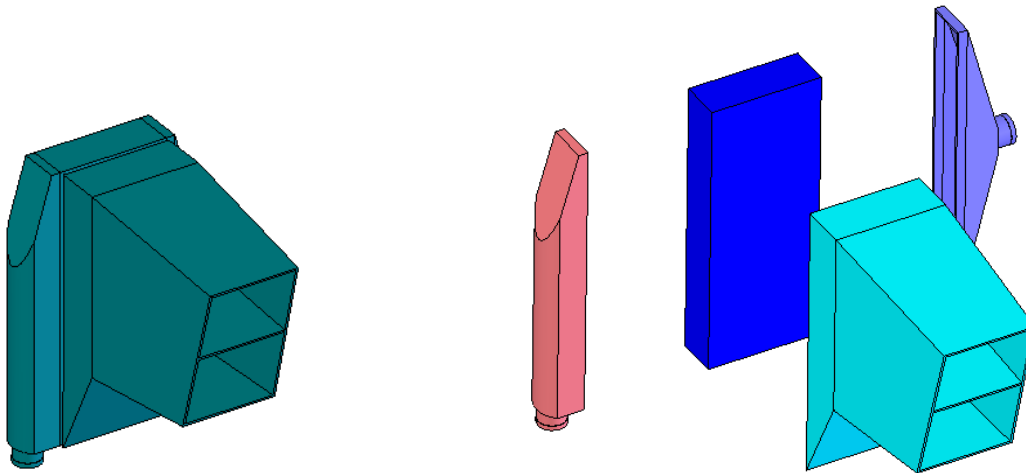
Assembled intercooler (left) and exploded view showing individual components (right).
